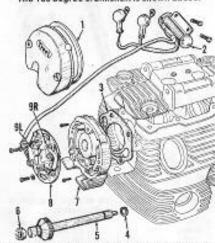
Exploded view of Type I ignition breaker points assembly. The automatic ignition advance mechanism is between the valve cam-8. Breaker plate assembly L. Left cylinder ignition
